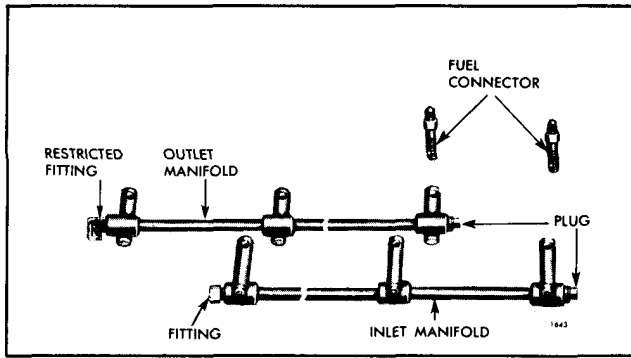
External Type Fuel Manifold Details and Relative Location of Parts
